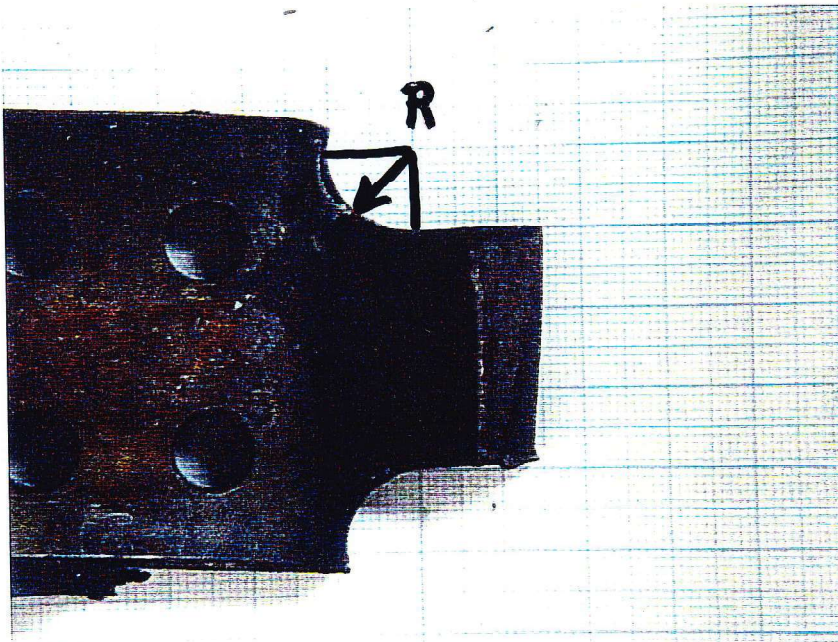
Mating part of the fitting removed from aircraft relative to the disassembled fractured upper and lower tangs.
